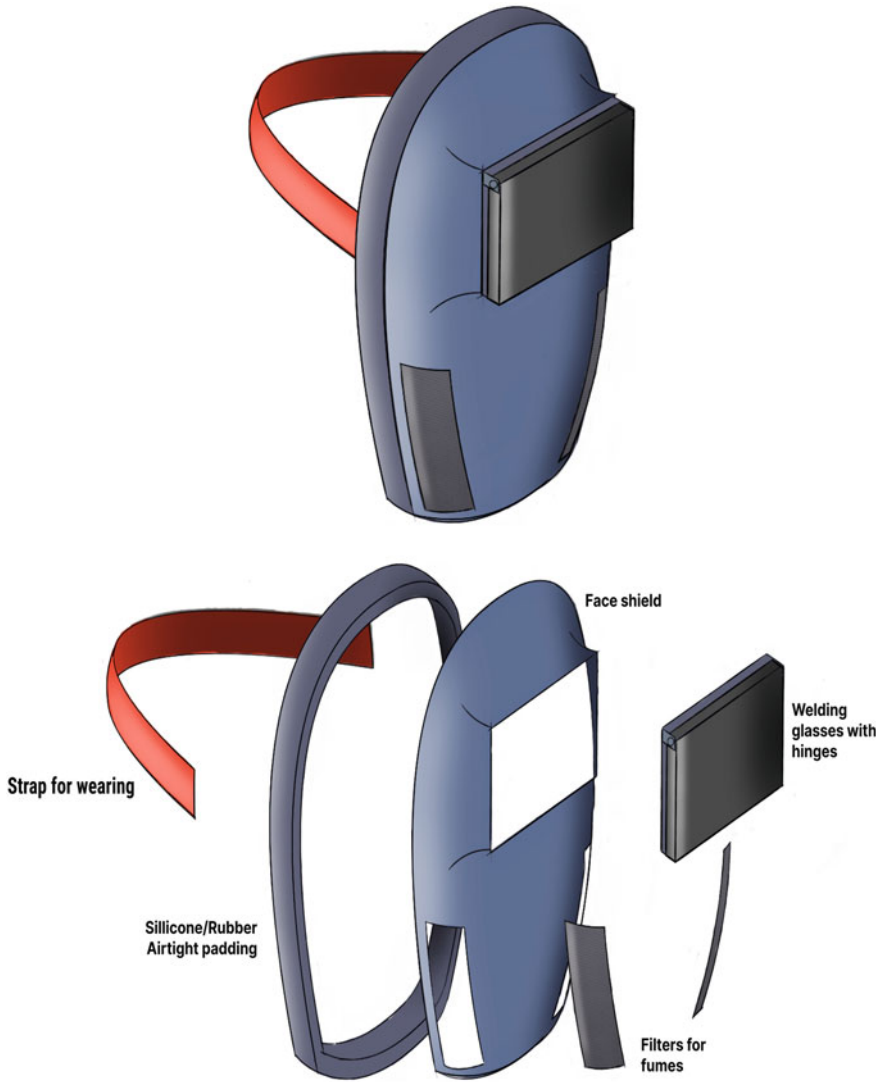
a Selected concept based on ranking. b Exploded view of the selected concept
